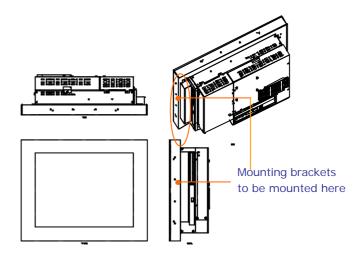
ODYSSE S MOUNTING WITH L-SHAPE MOUNTING BRACKETS
